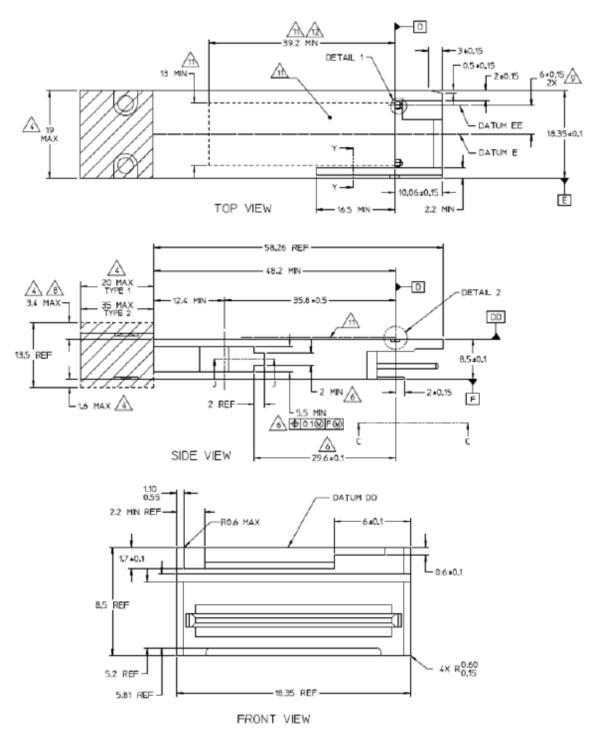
FTCD1333E1PCL Mechanical Dimensions.
